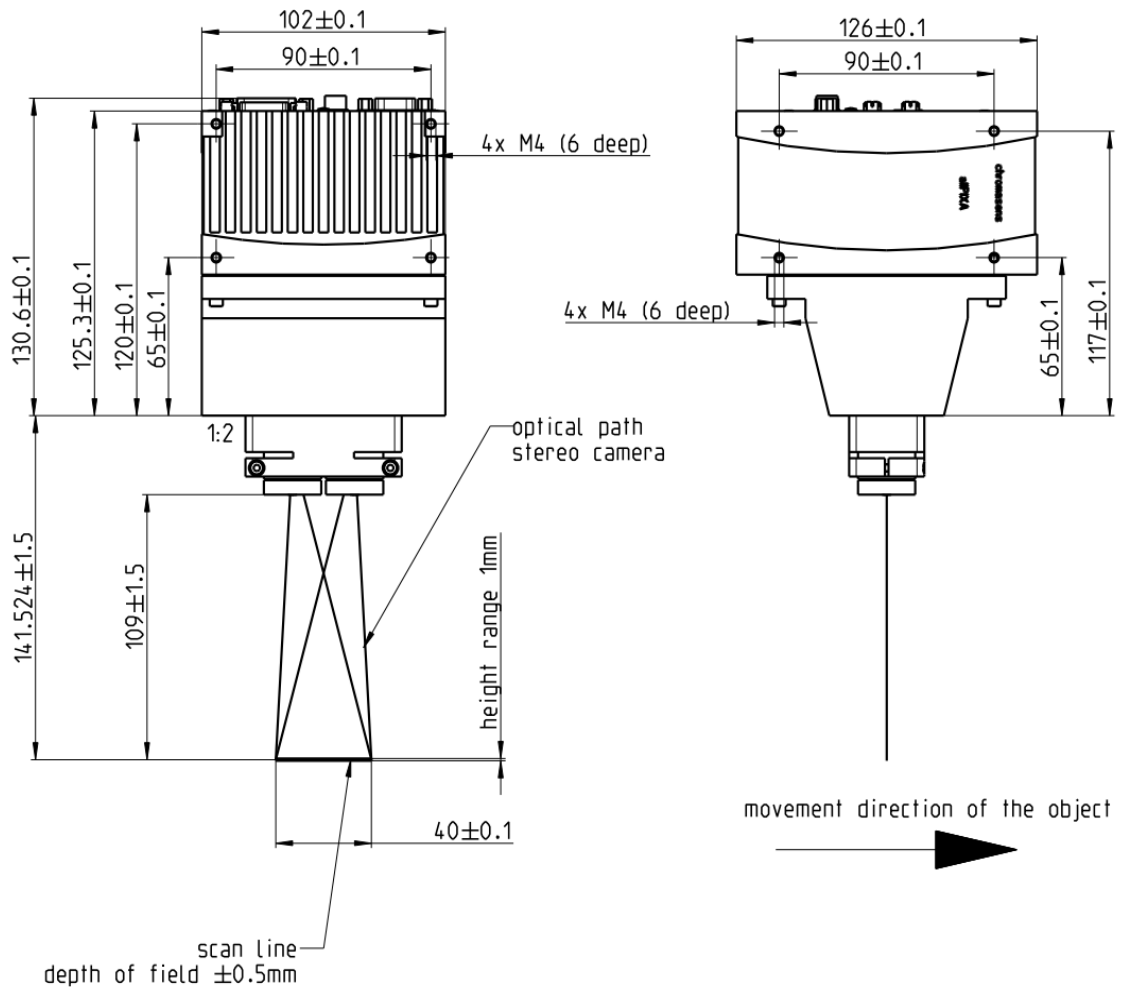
Mechanical Dimensions of 3D-PIXA-C15-A
